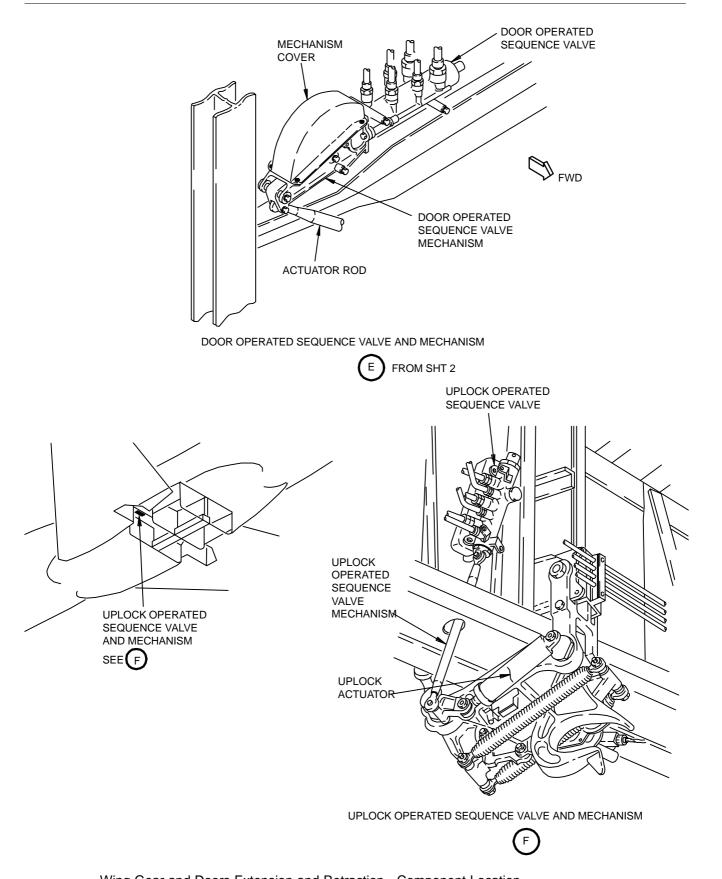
32-32 Wing Gear and Door Ext./Ret. Comp. Location Fig. 102 (Sheet 1)
